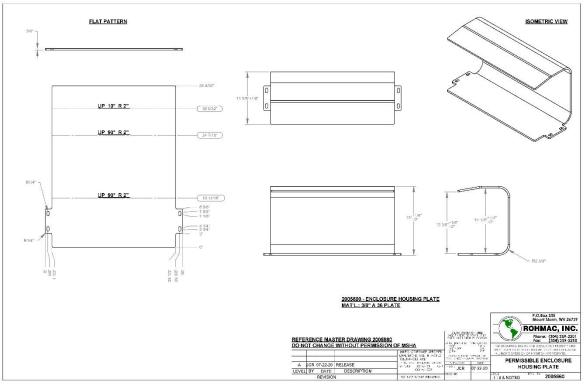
Revised XP Enclosure Housing Plate Drawing
